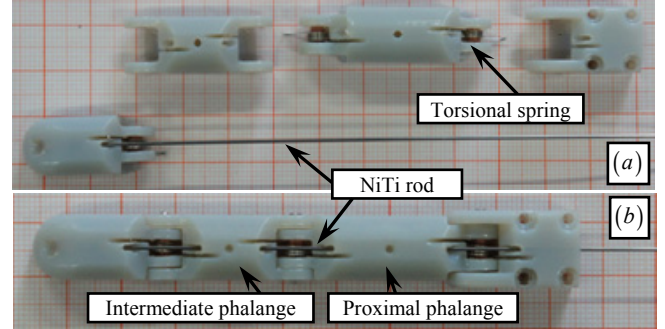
The index finger of the prosthetic hand: (a) parts and (b) assembly
